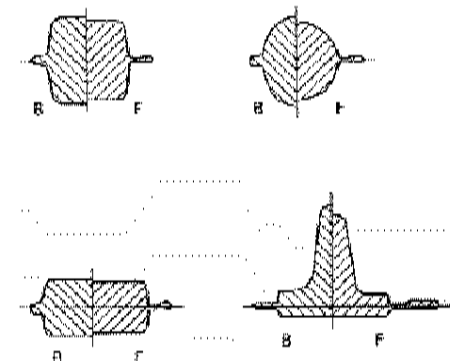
Suggested blocker cross sections for steel forgings. B, blocker; F, finished forging.
